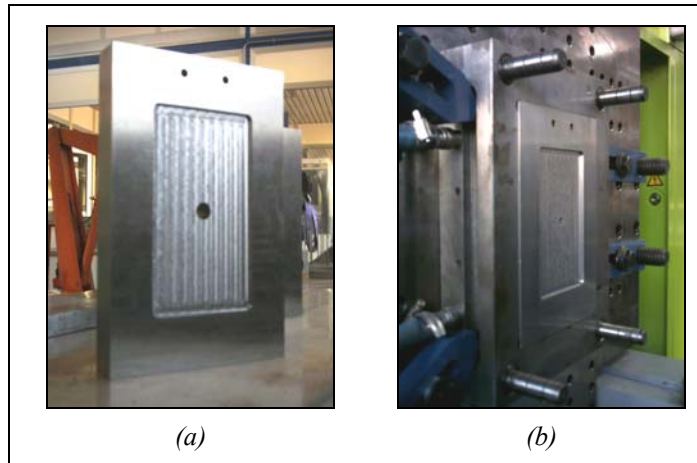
(a) Fixed insert; (b) fixed insert assembled into the fixed half of the mould base.
